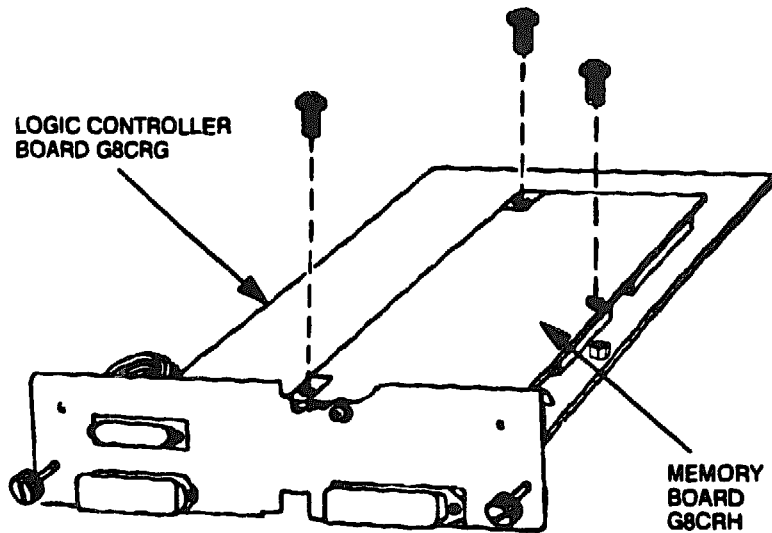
Memory Board G8CRH Removal (Early Printers Only)
